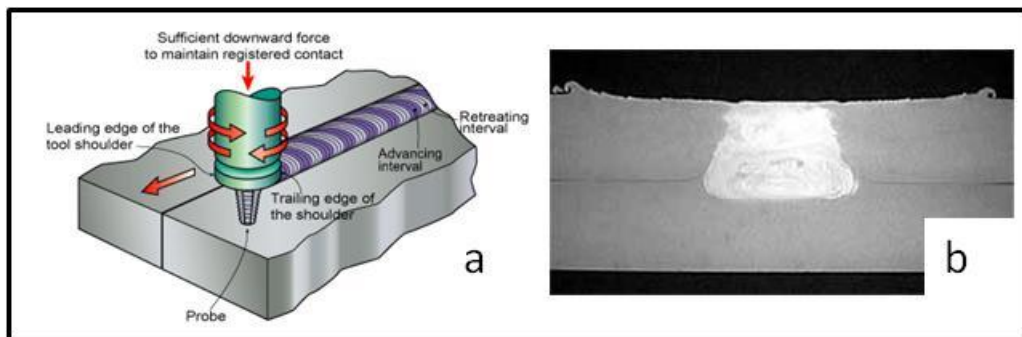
, a) Re-stir™ Process Principle, b) Re-stir™ Weld Region, [106].
